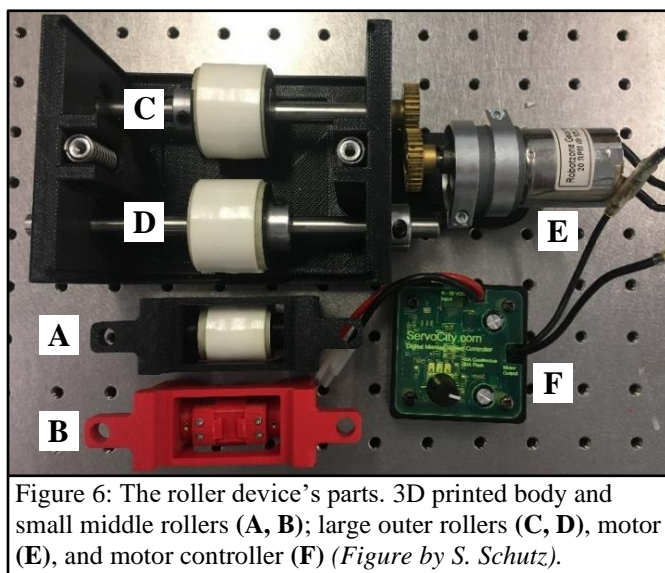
The roller device's parts. 3D printed body and small middle rollers (A, B); large outer rollers (C, D), motor (E), and motor controller (F) (Figure by S. Schutz).
